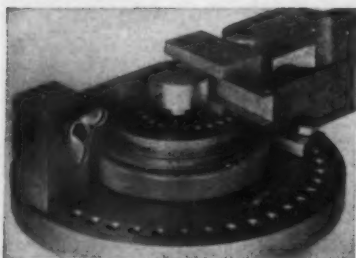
Close-up of forming nose and mandrel, which are readily adjustable to bend channel material in any shape.
